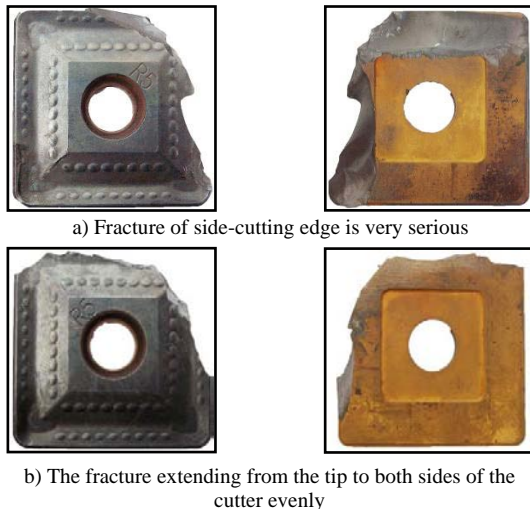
State of fracture failure of the super-heavy powerful turning cutter
